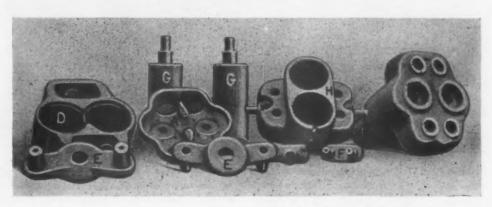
The Cores and the Finished Casting at the Extreme Right.
